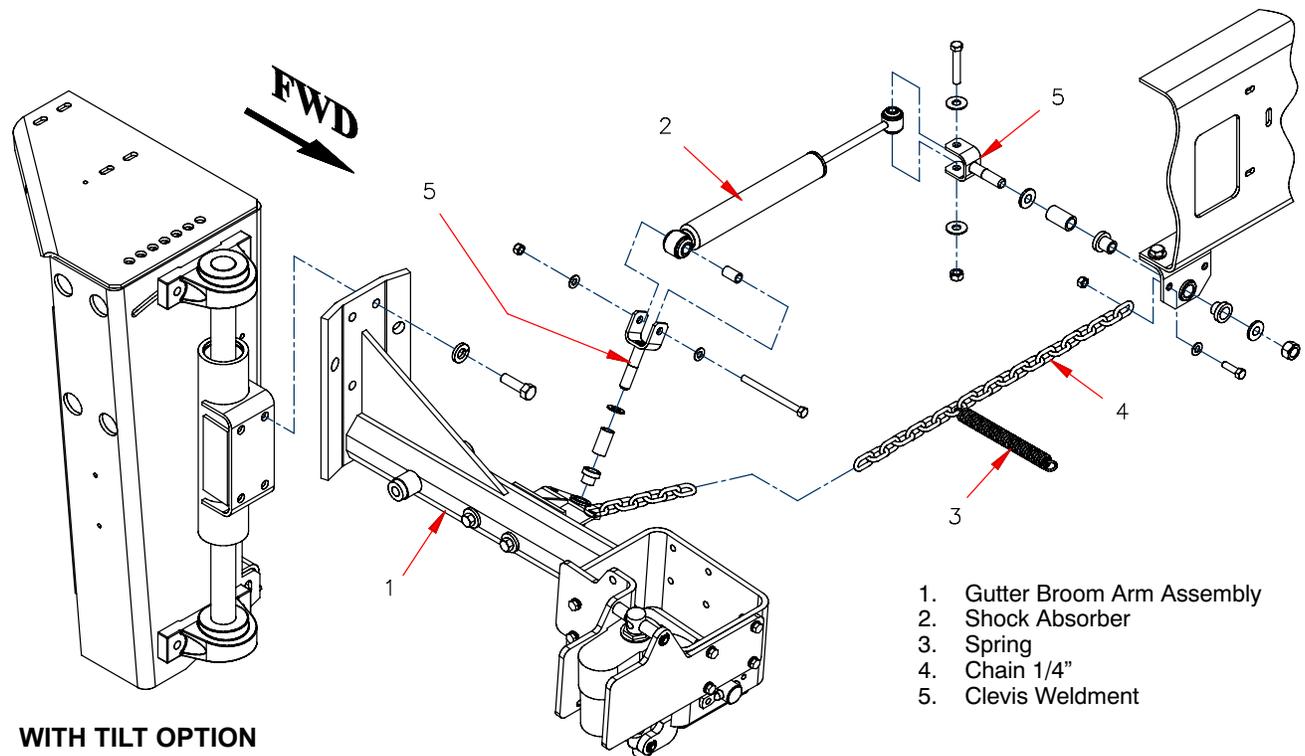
B The gutter broom arm shock absorber mounts to the gutter broom arm and to the frame. A jack may be required when working on the gutter broom arm assembly to relieve the spring tension.
